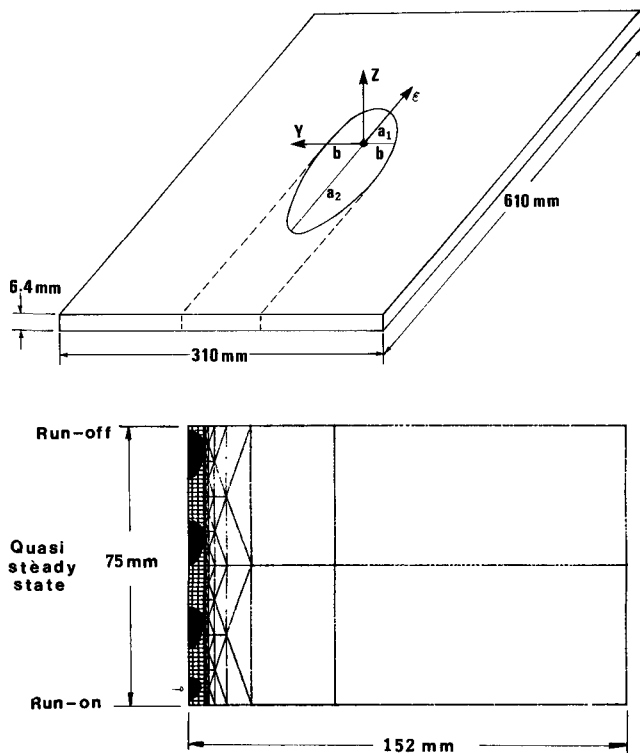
In-plane FEA of a thin plate ($g = 6.4$ mm) aluminum (Al-7003) weld showing how the weld pool expands from run-on size to the quasi-stationary state and expands again at run-off; welding process: gas metal arc weld (GMAW): $V = 23.5$ volts, 285 amps, 21.5 mm/s, $T_0 = 20.5$ °C; ellipsoid parameters $a_1 = 3$ mm, $a_2 = 9$ mm, $b = 3$ mm; thermal properties: temperature sensitive thermal conductivity and heat capacity taken from the data of Touloukian,²⁹ emissivity $\epsilon = 0.2$,⁵³ and convection coefficient $h = 12$ W/m °C.¹⁹
